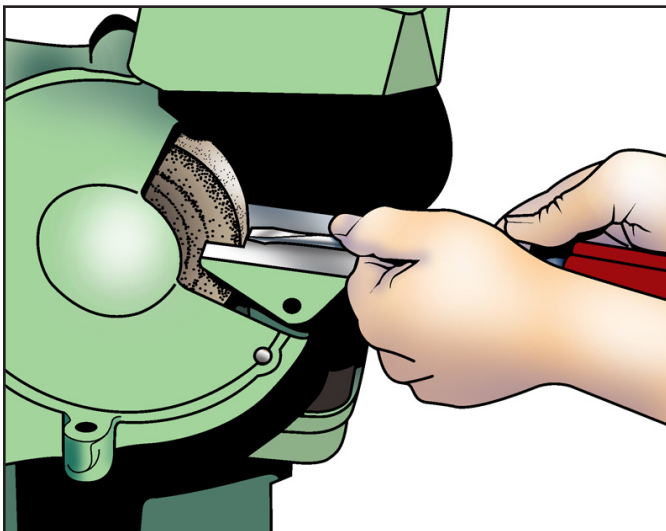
Reconditioning a Screwdriver on a Bench Grinder, With Tool Supported by the Tool Rest
